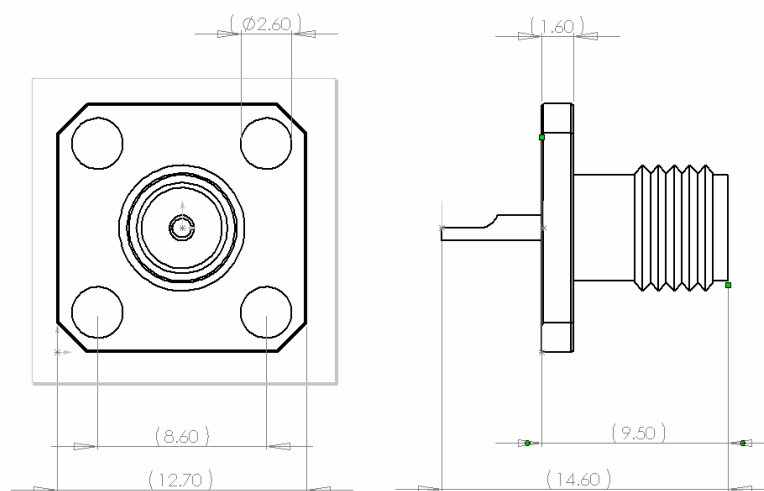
Panel jack (female) SMA connector with a solder pot. [1] – [3]
